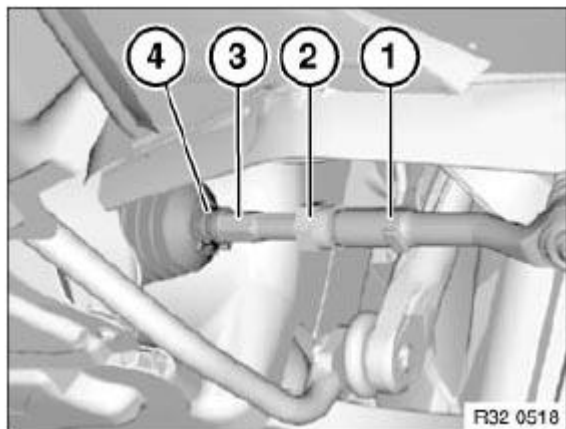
Identifying Clamping Nut, Tie Rod End And Clamp
